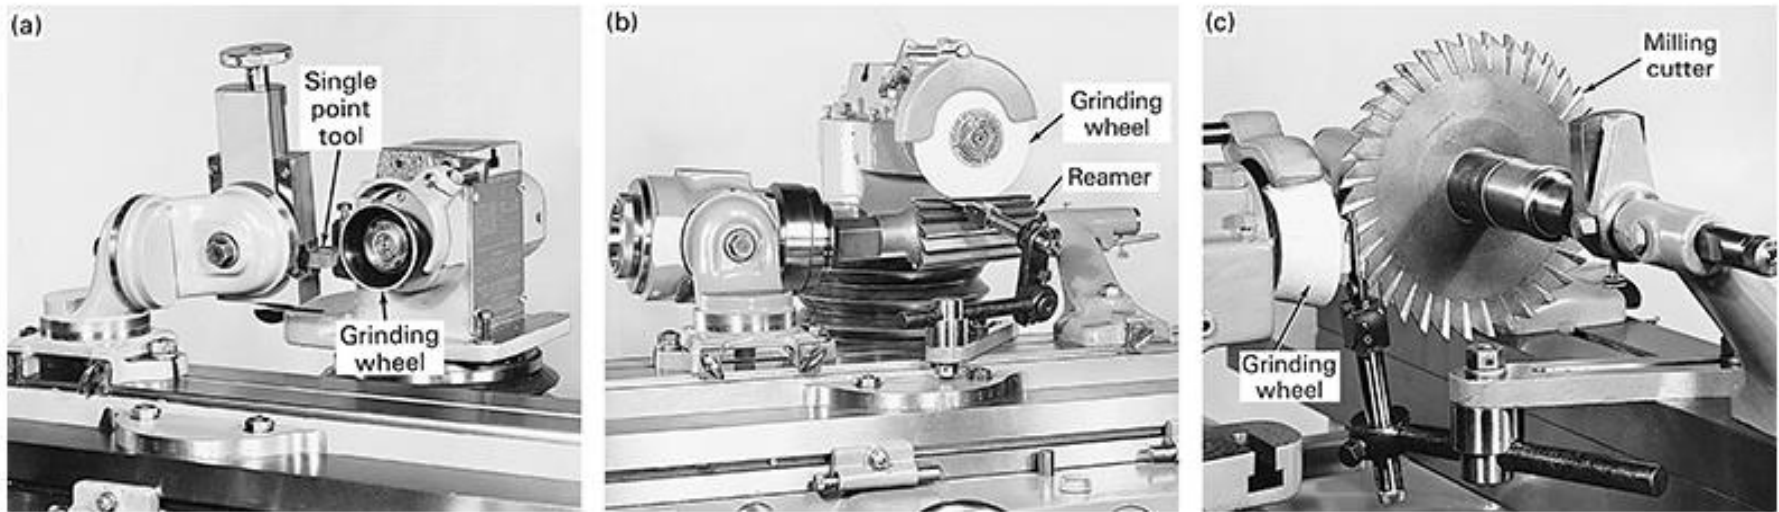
Three typical setups for grinding single- and multiple-edge tools on a universal tool and cutter grinder. (a) Singlepoint tool is held in a device that permits all possible angles to be ground. (b) Edges of a large hand reamer are being ground. (c) Milling cutter is sharpened with a cupped grinding wheel.
